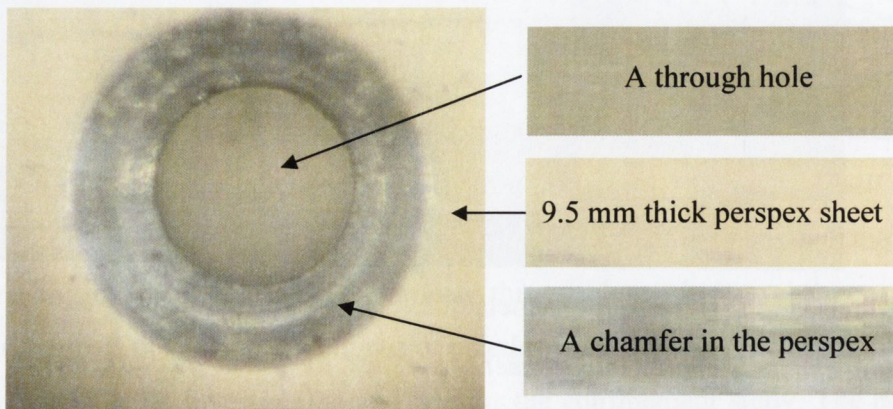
, A magnified overhead view of a  $610 \mu\text{m}$  diameter jet drilled into perspex that shows the chamfer caused by the initial wobble in the drill.
